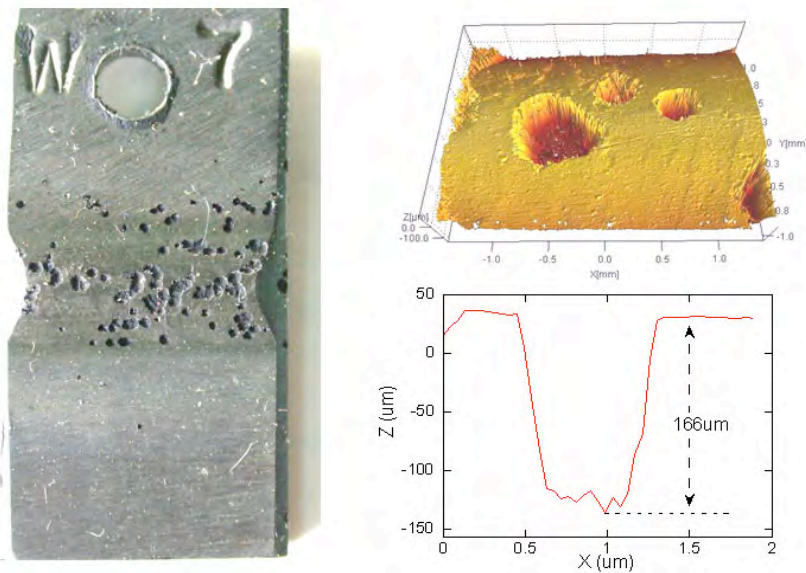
Macrophotograph of weldment W7. (left) pits in the weld area, (right top) profile of metal dusting pits in weld area, and (right bottom) depth of a metal dusting pit.
